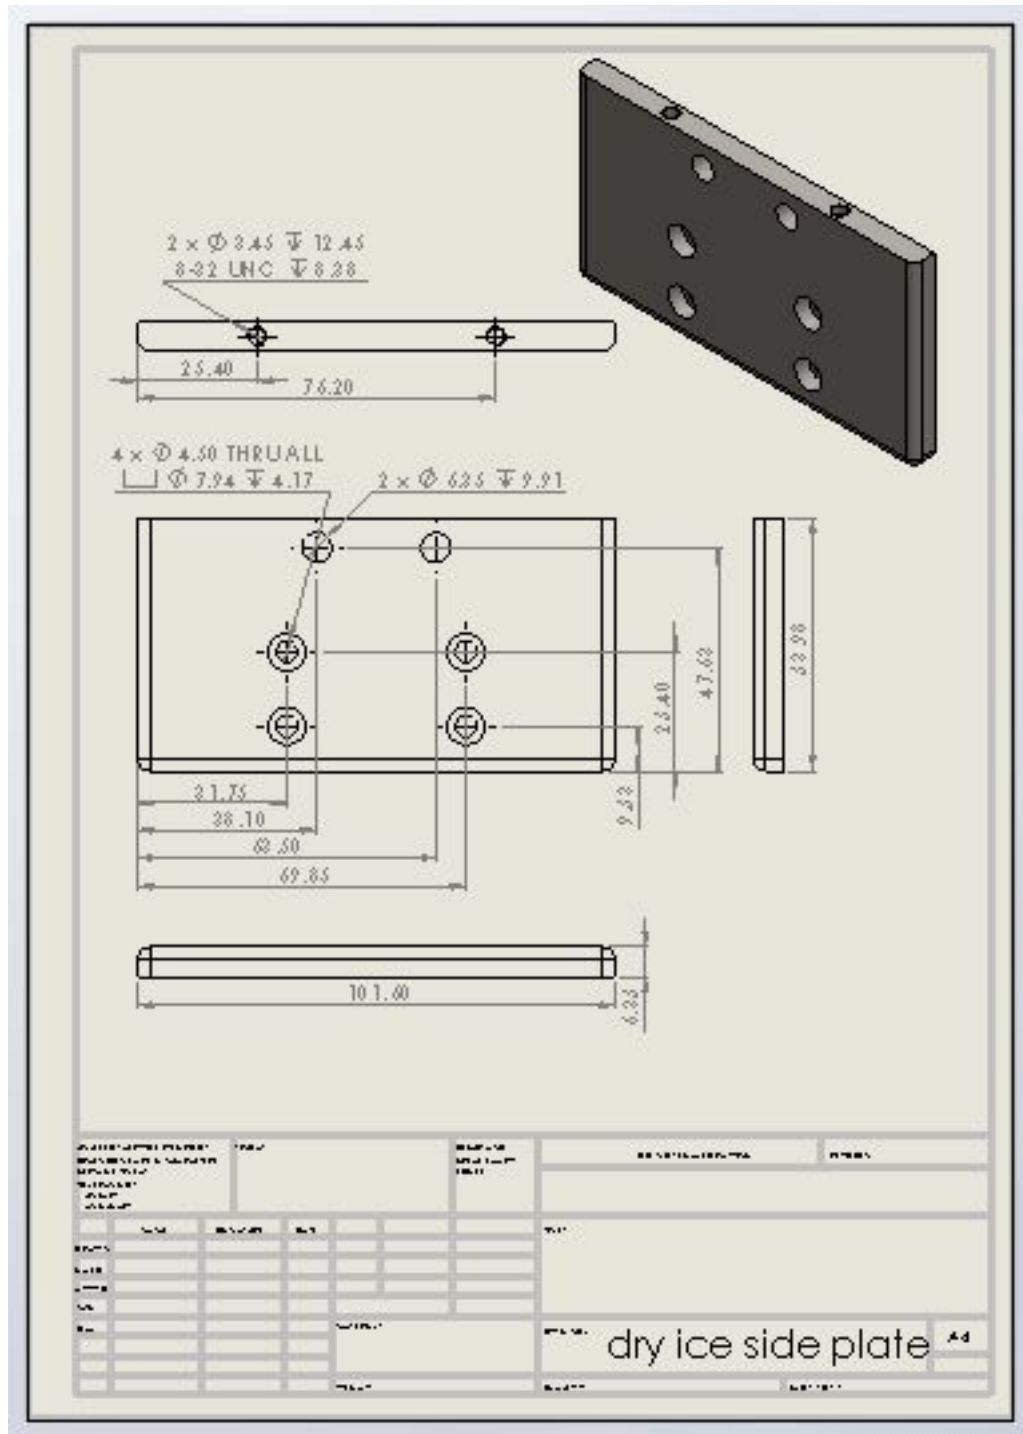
Dimensioned drawing of dry ice sideplate for ligament attachment fixture.
